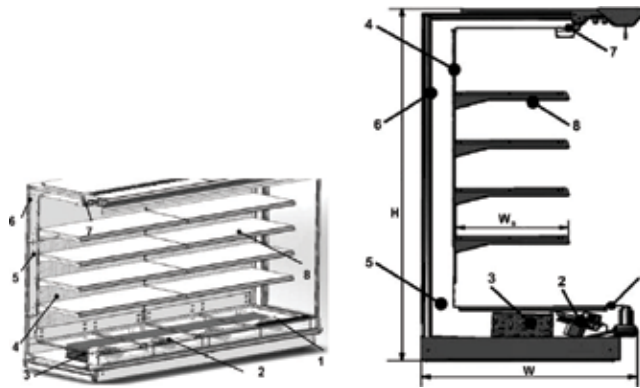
Vertical display cabinet with four shelves. 1, base grill (GRA); 2, fans; 3, evaporator coil; 4, perforated plate; 5, air plenum; 6, thermal insulation; 7, horizontal grill (GPA); 8, shelves.
